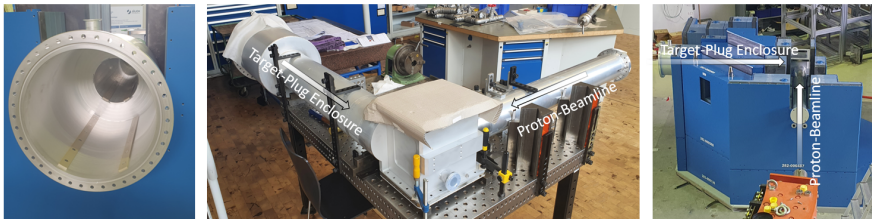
left: look into the enclosure for the target plug of the L-tube; centre: L-tube (design of the 10 kW HBS prototype) which carries the target plug and continues the proton beam line; right side: L-tube inside partly build up target station prototype
